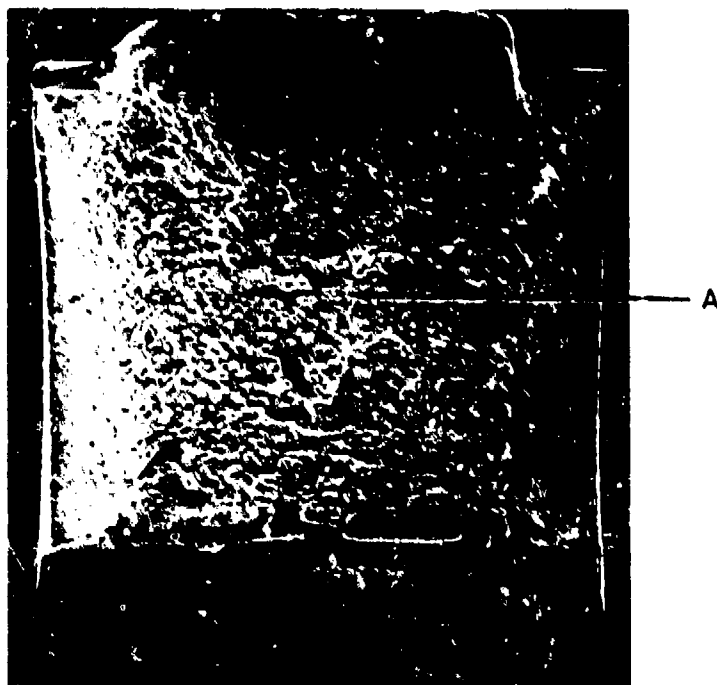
Fracture surface of an HY-130 Charpy specimen tested at -18°C , 8x.
